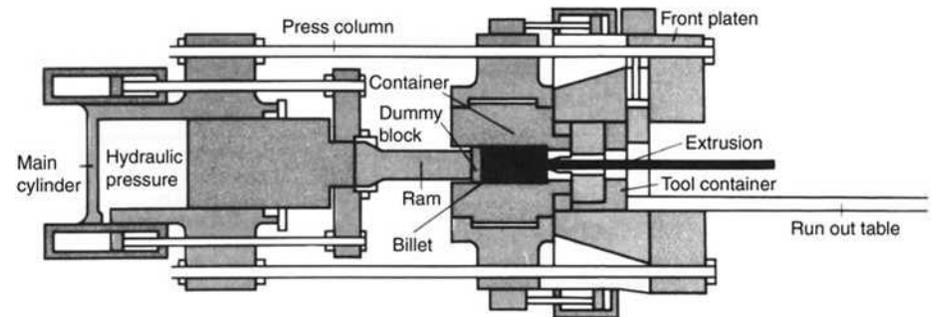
Schematic of a horizontal extrusion press showing a hydraulically powered ram forcing the heated billet through the die
